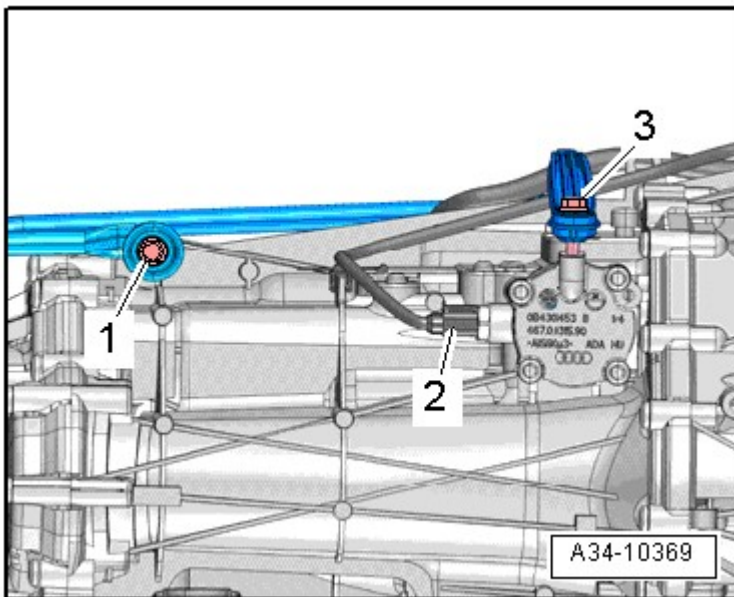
Attaching Bolts And For Selector Rod And Push Rod
